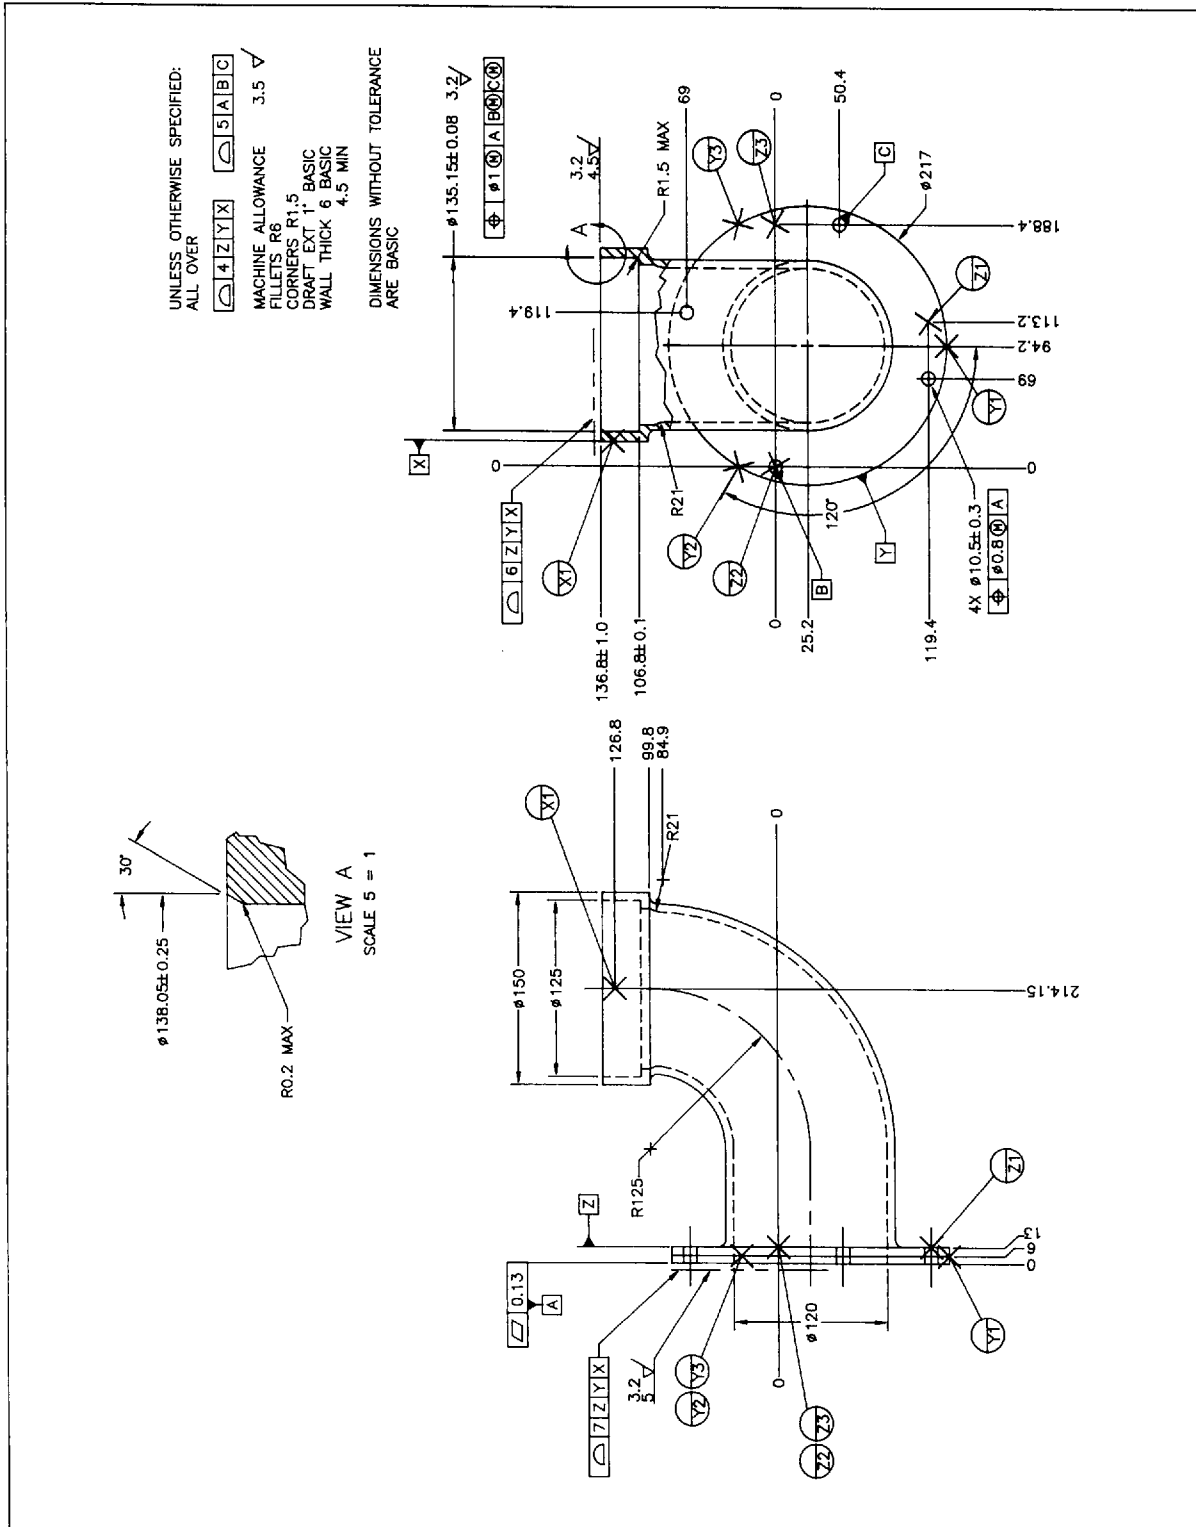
COMBINED VIEW (CASTING AND MACHINING REQUIREMENTS) DRAWING
